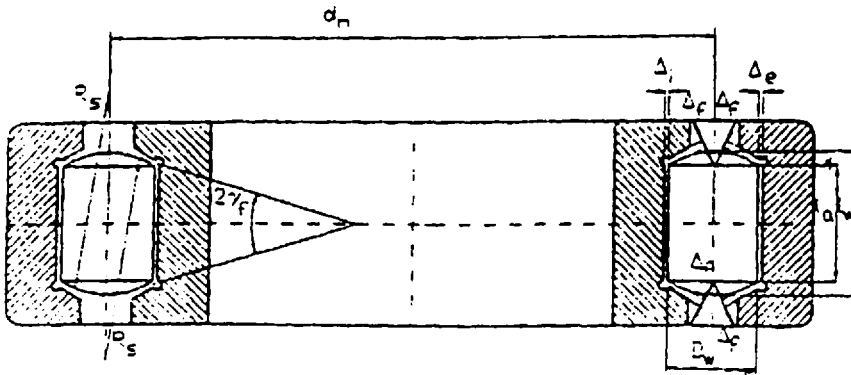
Internal geometry of NUP-type rolling bearing.
